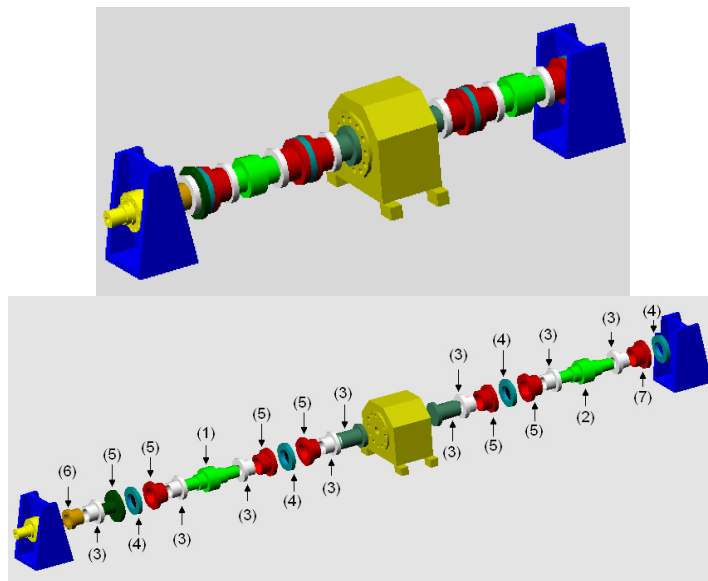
Torque transfer arrangement in the 1 kN-m hybrid torque standard machine.
